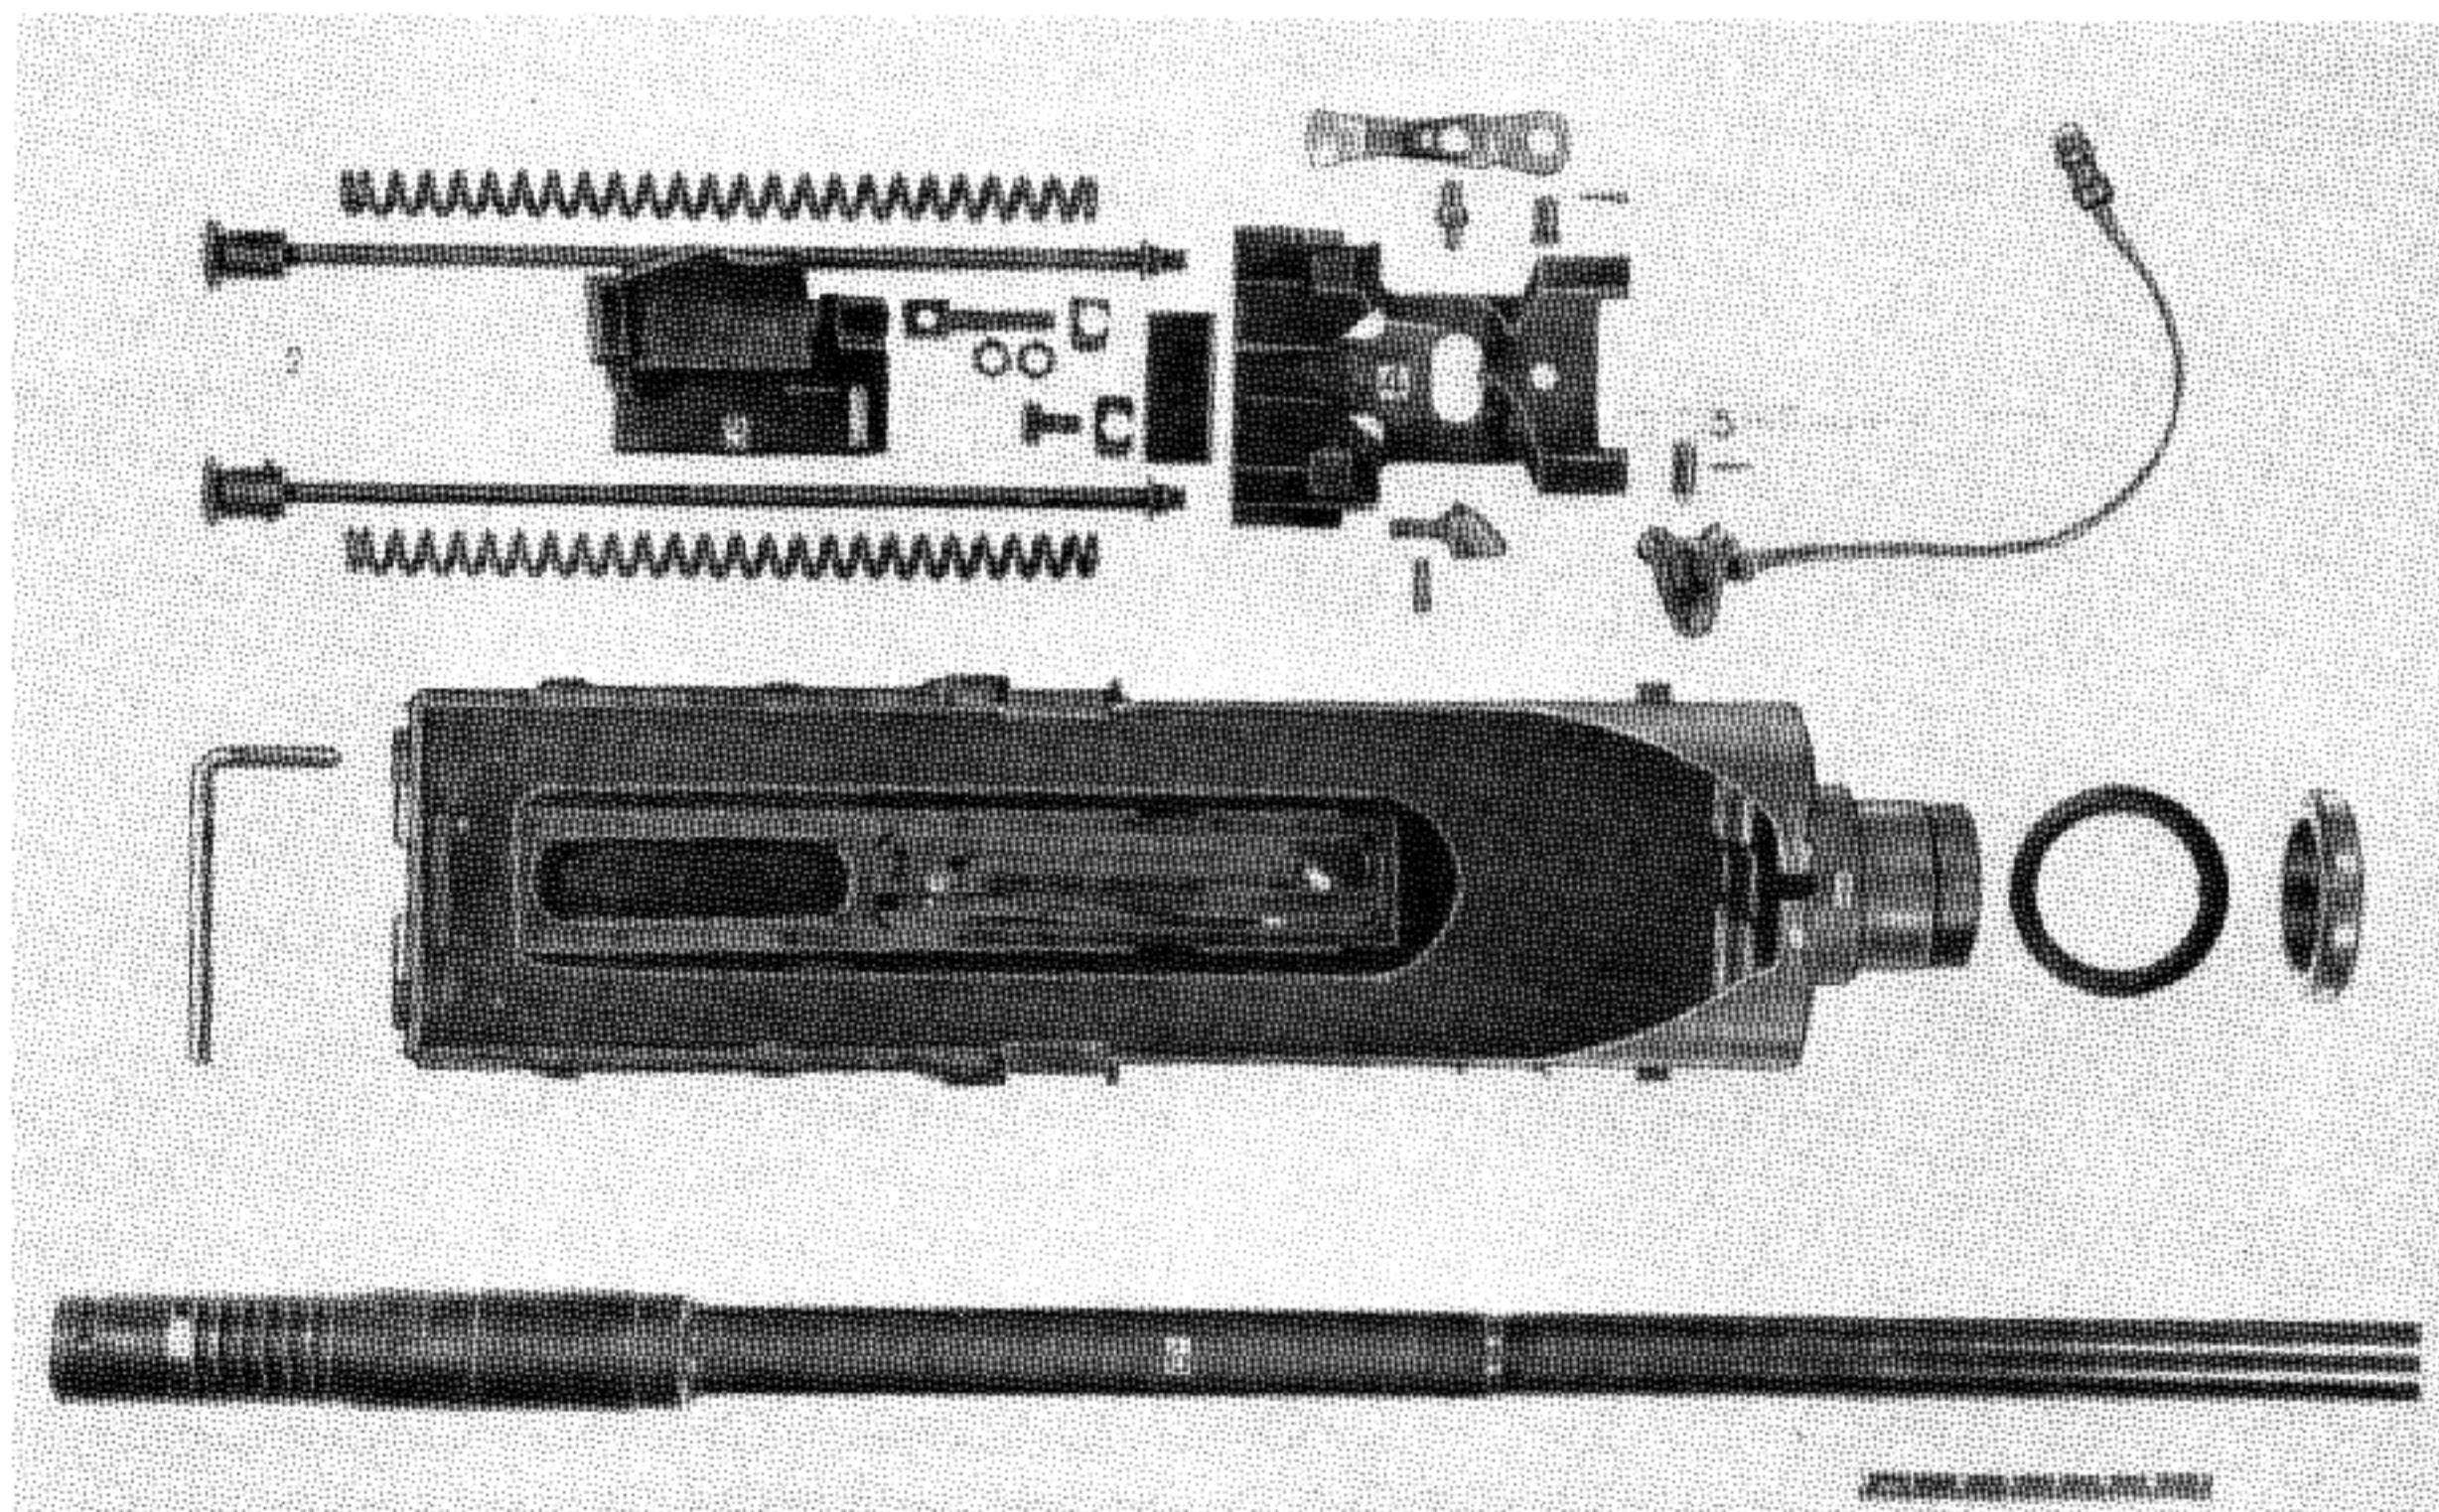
30-mm British Aden Gun. Disassembled view. (1) Receiver. (2) Return springs and guides. (3) Feed slide unit. (4) Slide unit. (5) Receiver slide electrical contact. (6) Barrel.
